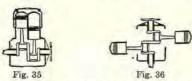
A two-throw crank shaft for a two-cylinder vertical sngine; crank set 180 degrees.
